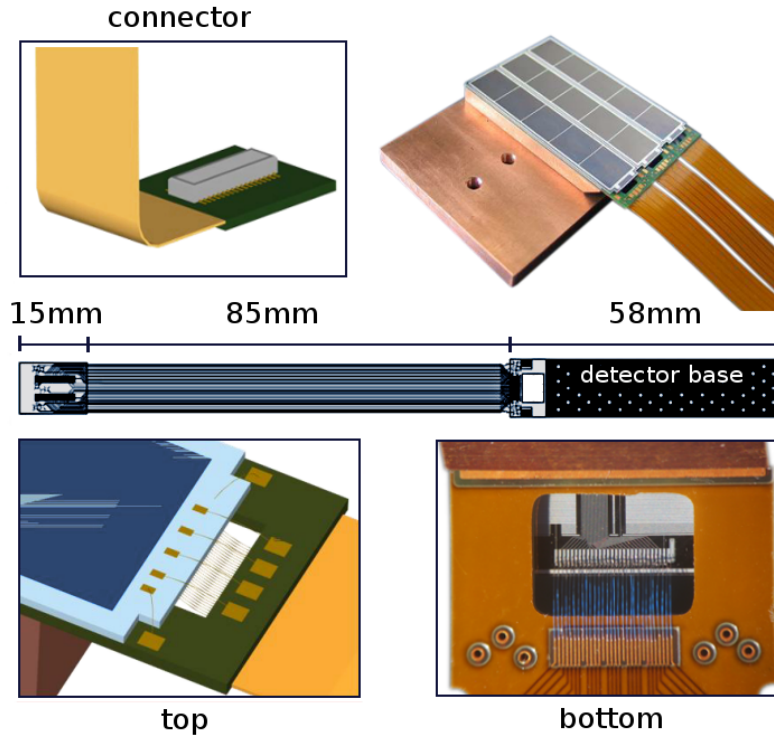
Features and dimensions of the flex PCB and its connector. In the top-right corner a photo of the modules is shown, while on the bottom-right corner there is a photo of the bondings on the bottom of the PCB.
